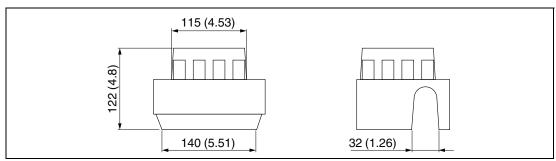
Protective cover for single compartment housing, aluminum or 316L, unit of measurement mm (inch)
